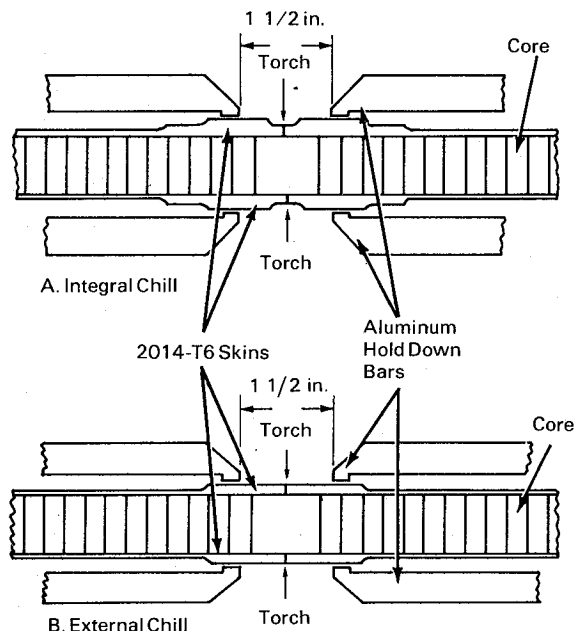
Tooling and Weld Joints for Sandwich Panel
